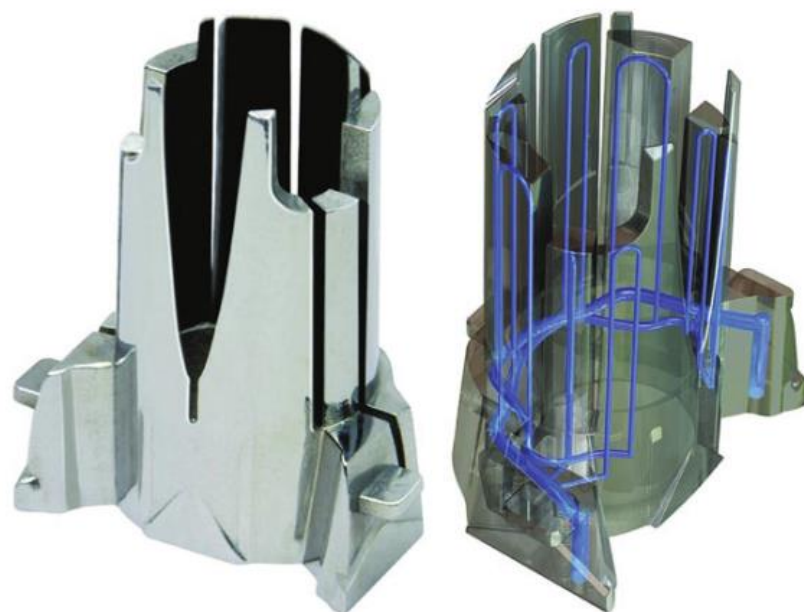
cooling channels inside the mould part (Milewski, 2017)
